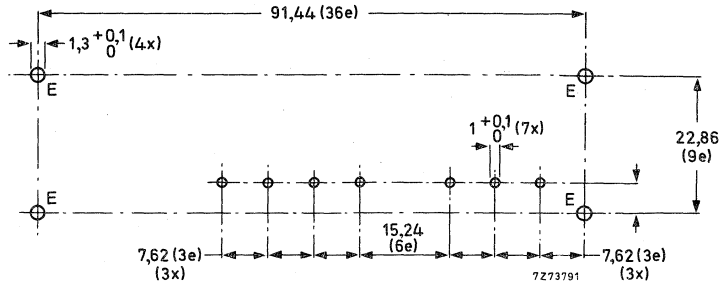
Piercing diagram viewed from solder side of board; e = 2,54 mm (0,1 in).
